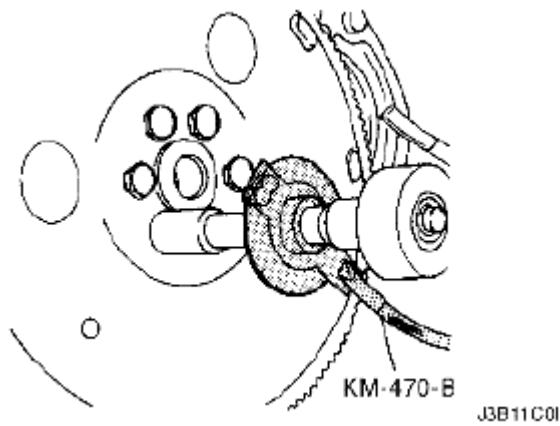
Identifying Flywheel Or Flexible Plate Bolts
